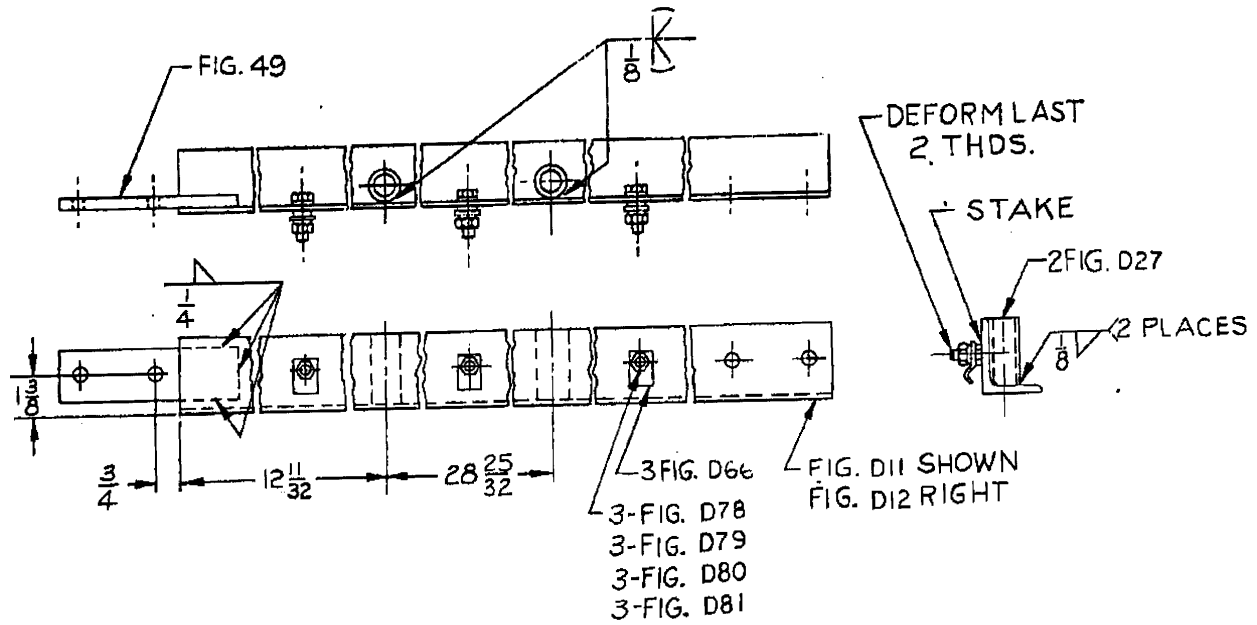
(SHOWN) FIGURE D10 (OPPOSITE). Base frame assembly.
